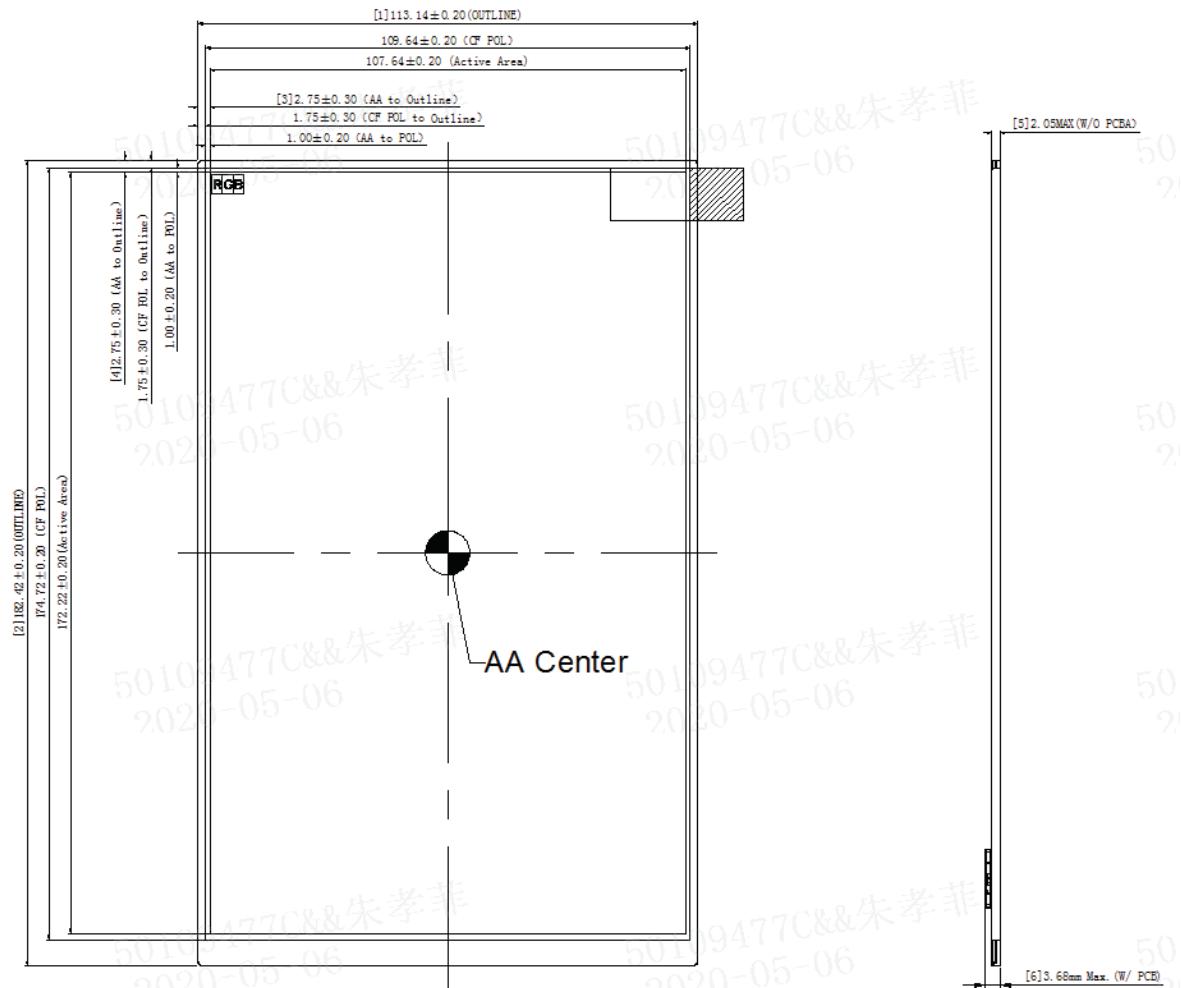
TFT-LCD Module Outline Dimension (Front View)
